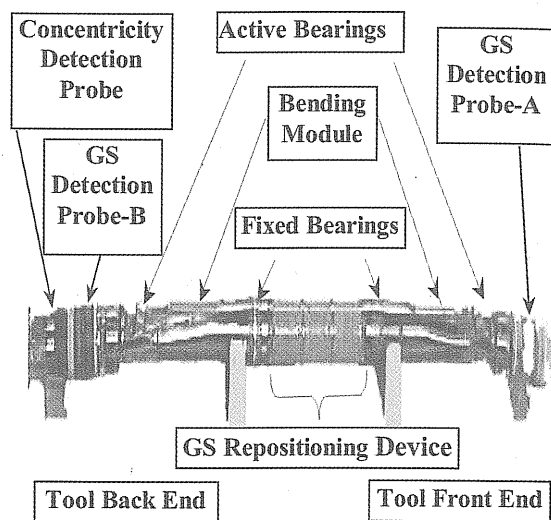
INGRES-4S tool head assembly with its some sub modules and auxiliary components.
